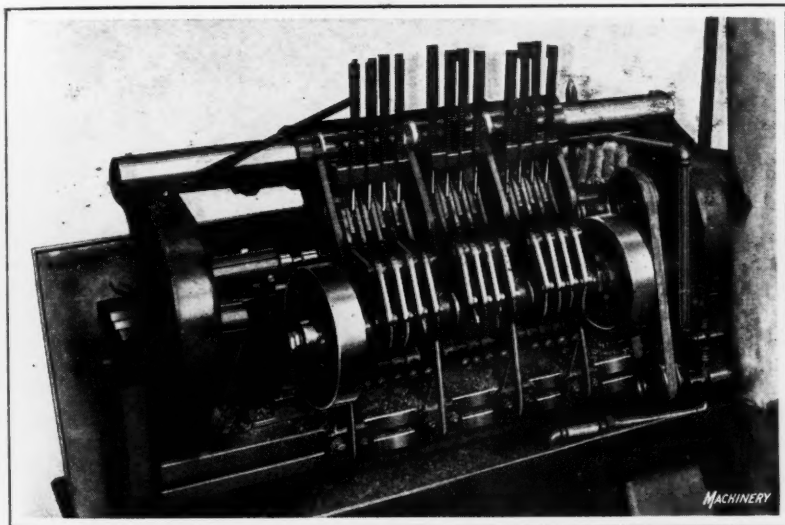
Rear View of Camshaft Lathe, showing Swinging Tool-holders and Master Cams
